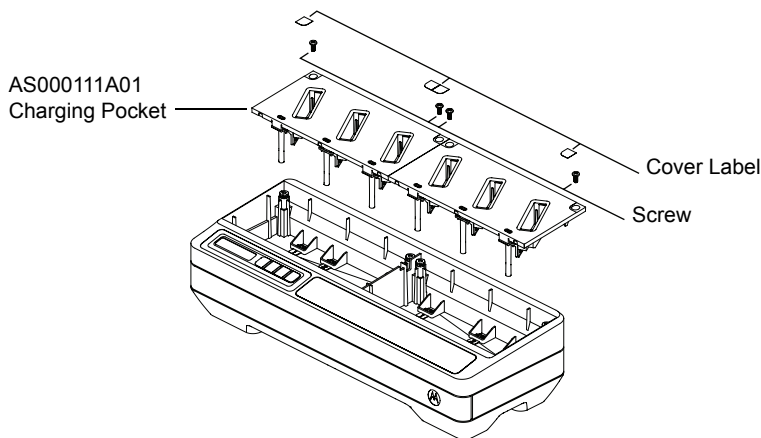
Installing and Removing AS000111A01 Charging Pocket
